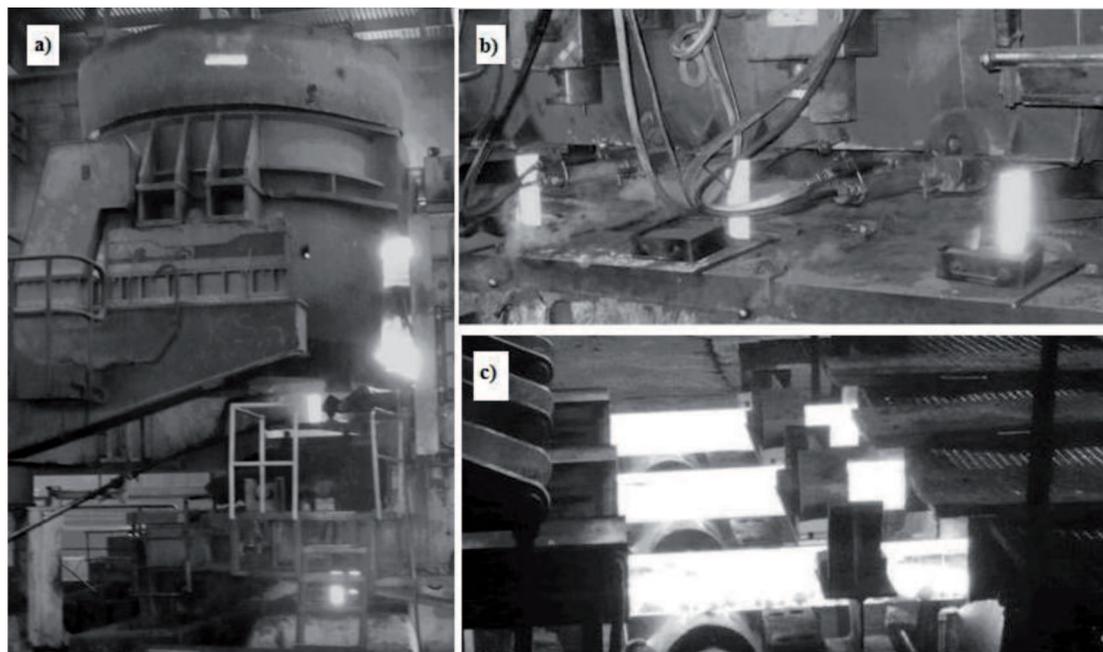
View of Ferrostal Łabędy CC device: a) general view, b) immersion nozzles, c) casted ingots
